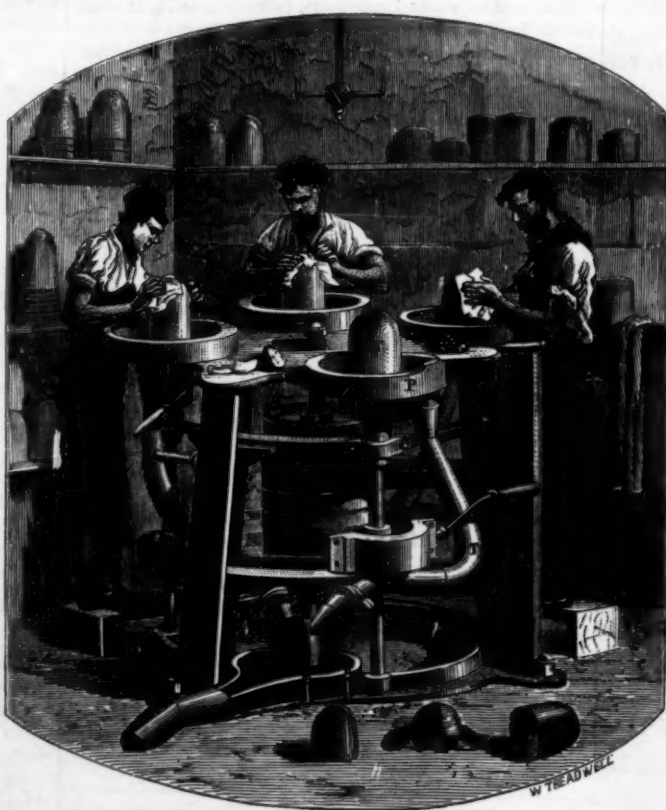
HAT MOLDING AND SHAPING MACHINERY.
